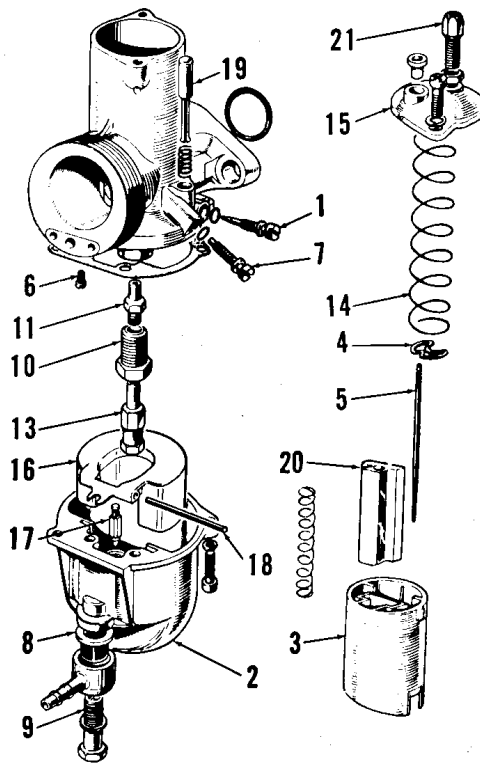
Exploded view of Amal carburetor with concentric float.
